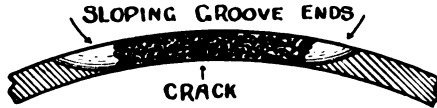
A SECTIONAL VIEW OF THE DAMAGED PORTION, SHOWING HOW THE CRACK WAS GROOVED AND LATER FILLED
